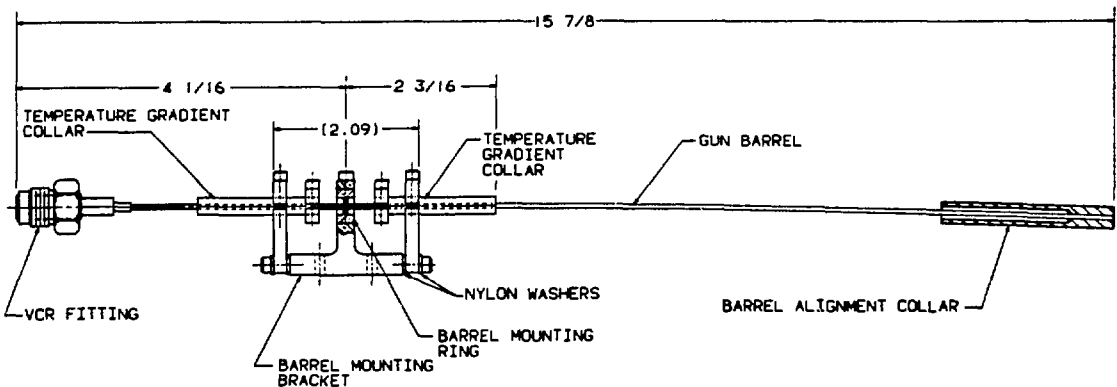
Gun barrel assembly details for the PBX eight-shot pipe-gun injector.
